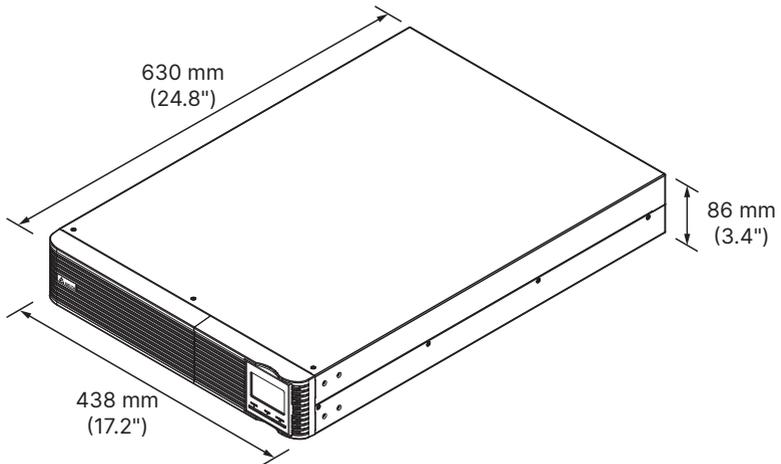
Exterior & Dimensions_ 1kVA)
